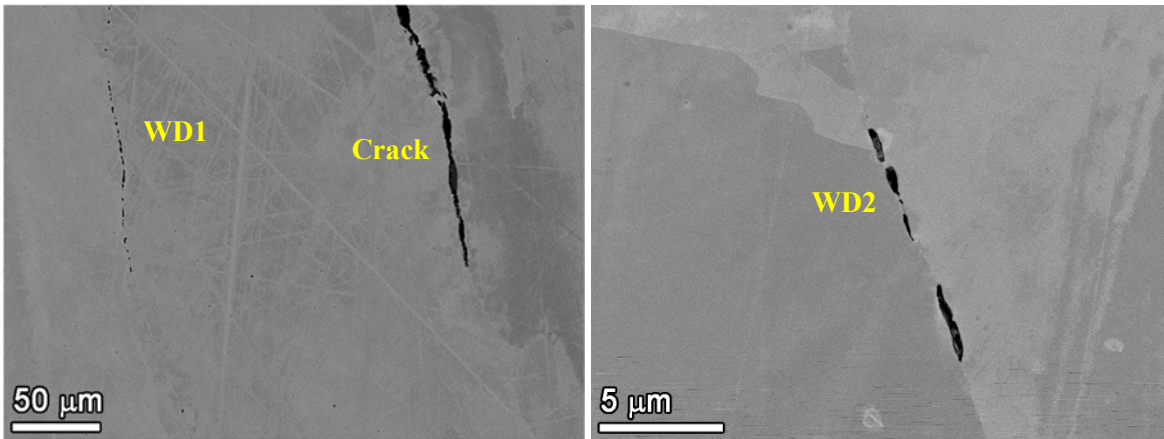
SEM-BSE examples of IG weld defects observed in the slice removed from CT148 after 16,000 hours of exposure.
